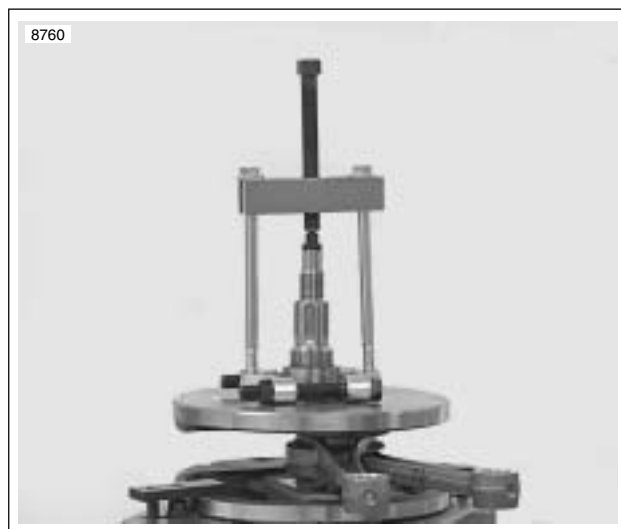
Removing Sprocket Shaft Inner Bearing Race
